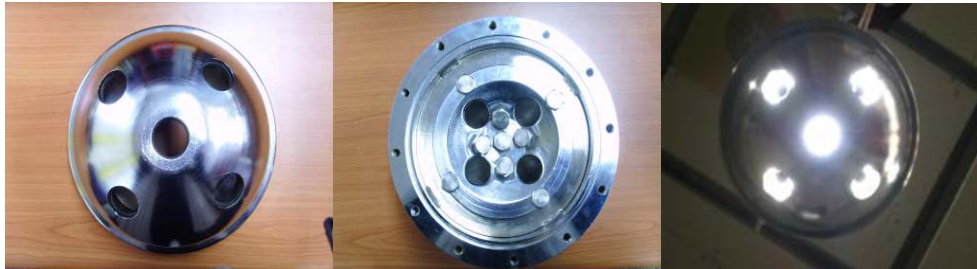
Completed multi-directional underwater CCTV camera system (rear, front and completed views) machined with the use of CNC machinery.
